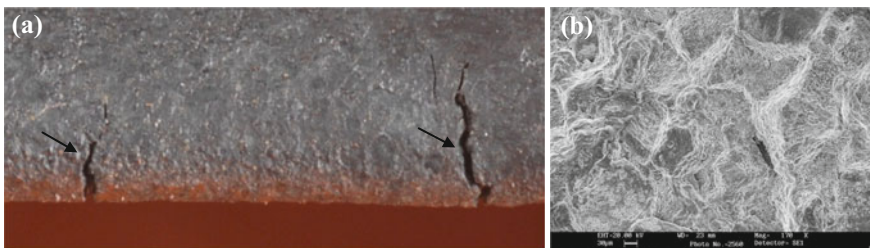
a Cracks on the leading edge of the HPTR blade, and b fracture surface showing transgranular cleavage
